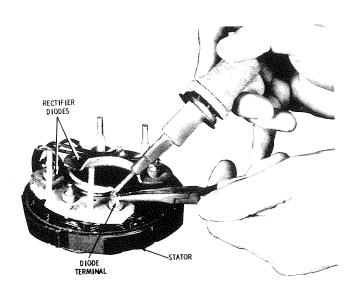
UNSOLDERING RECTIFIER DIODE
